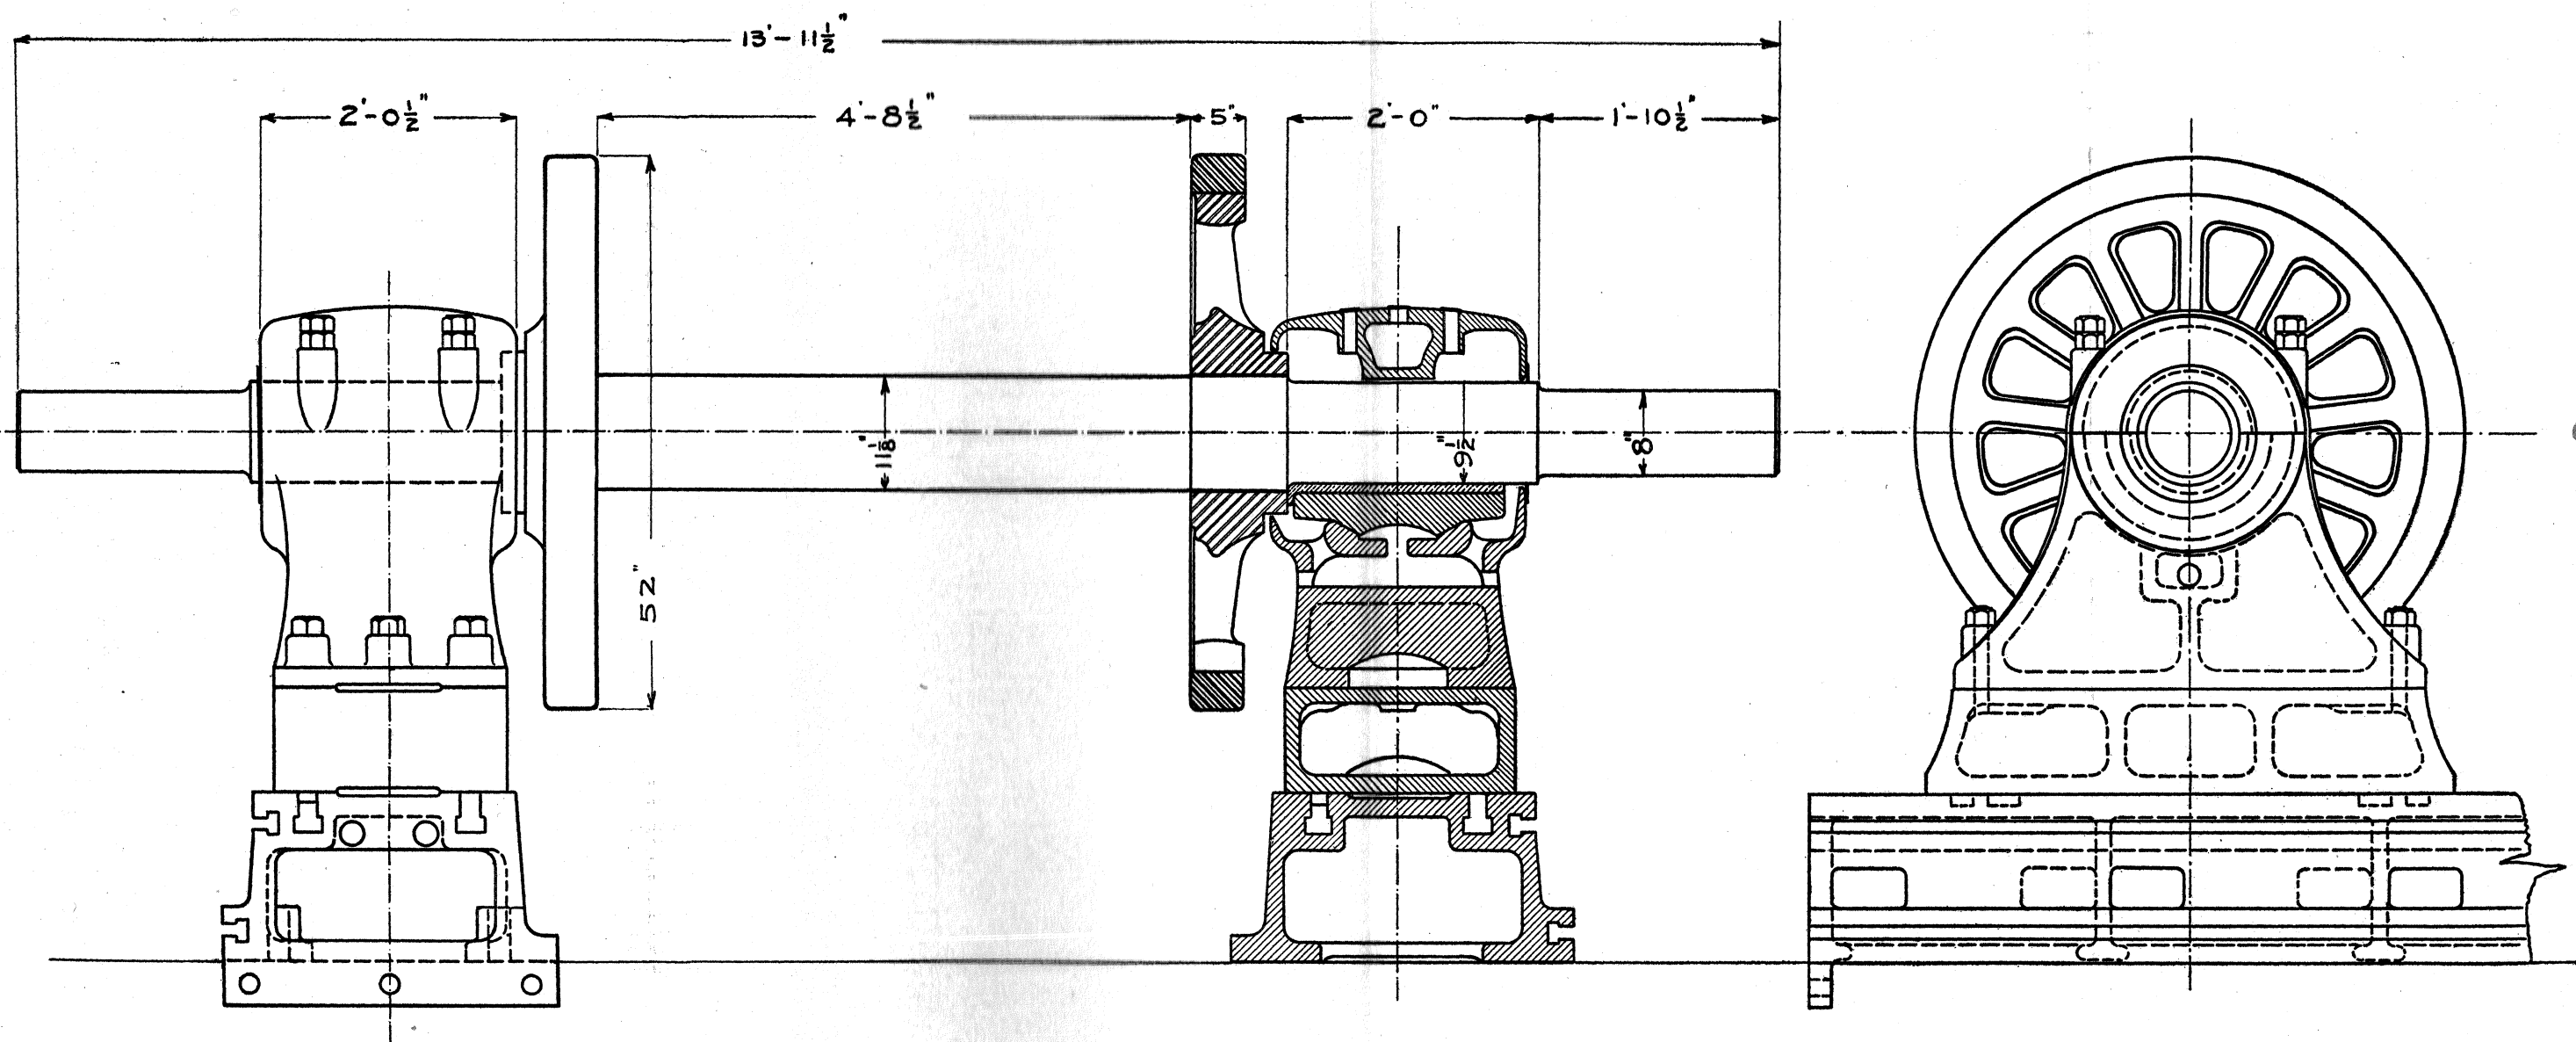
One Pair of Supporting Wheels, with Axle, Bearings and Bed Plate.
